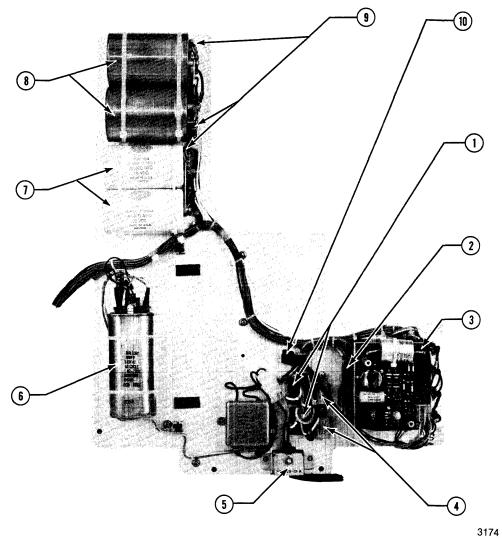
D3000 Extension Disk Drive, Photo Parts Index (Power Supply Assembly)
